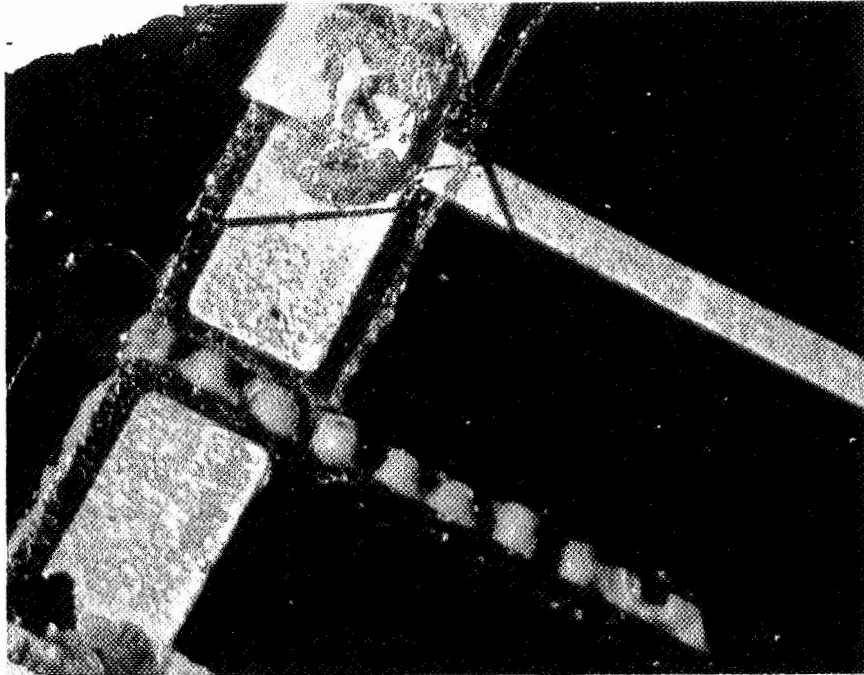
Fractured Cell at Foot in G7 Module
